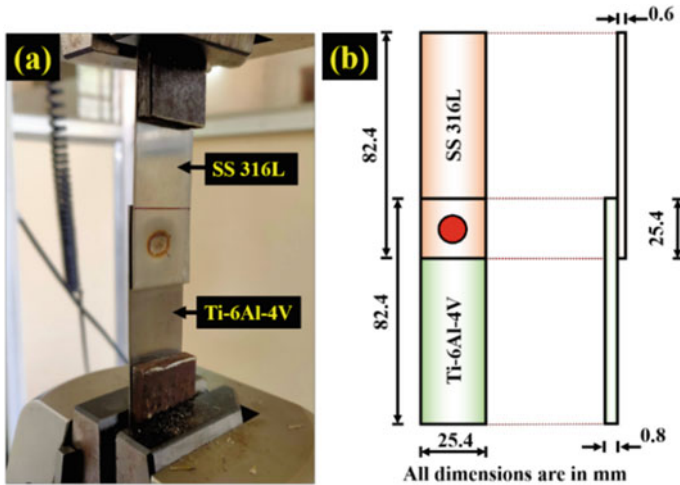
a Spot weldment in lap configuration and b schematic of the welded specimen
